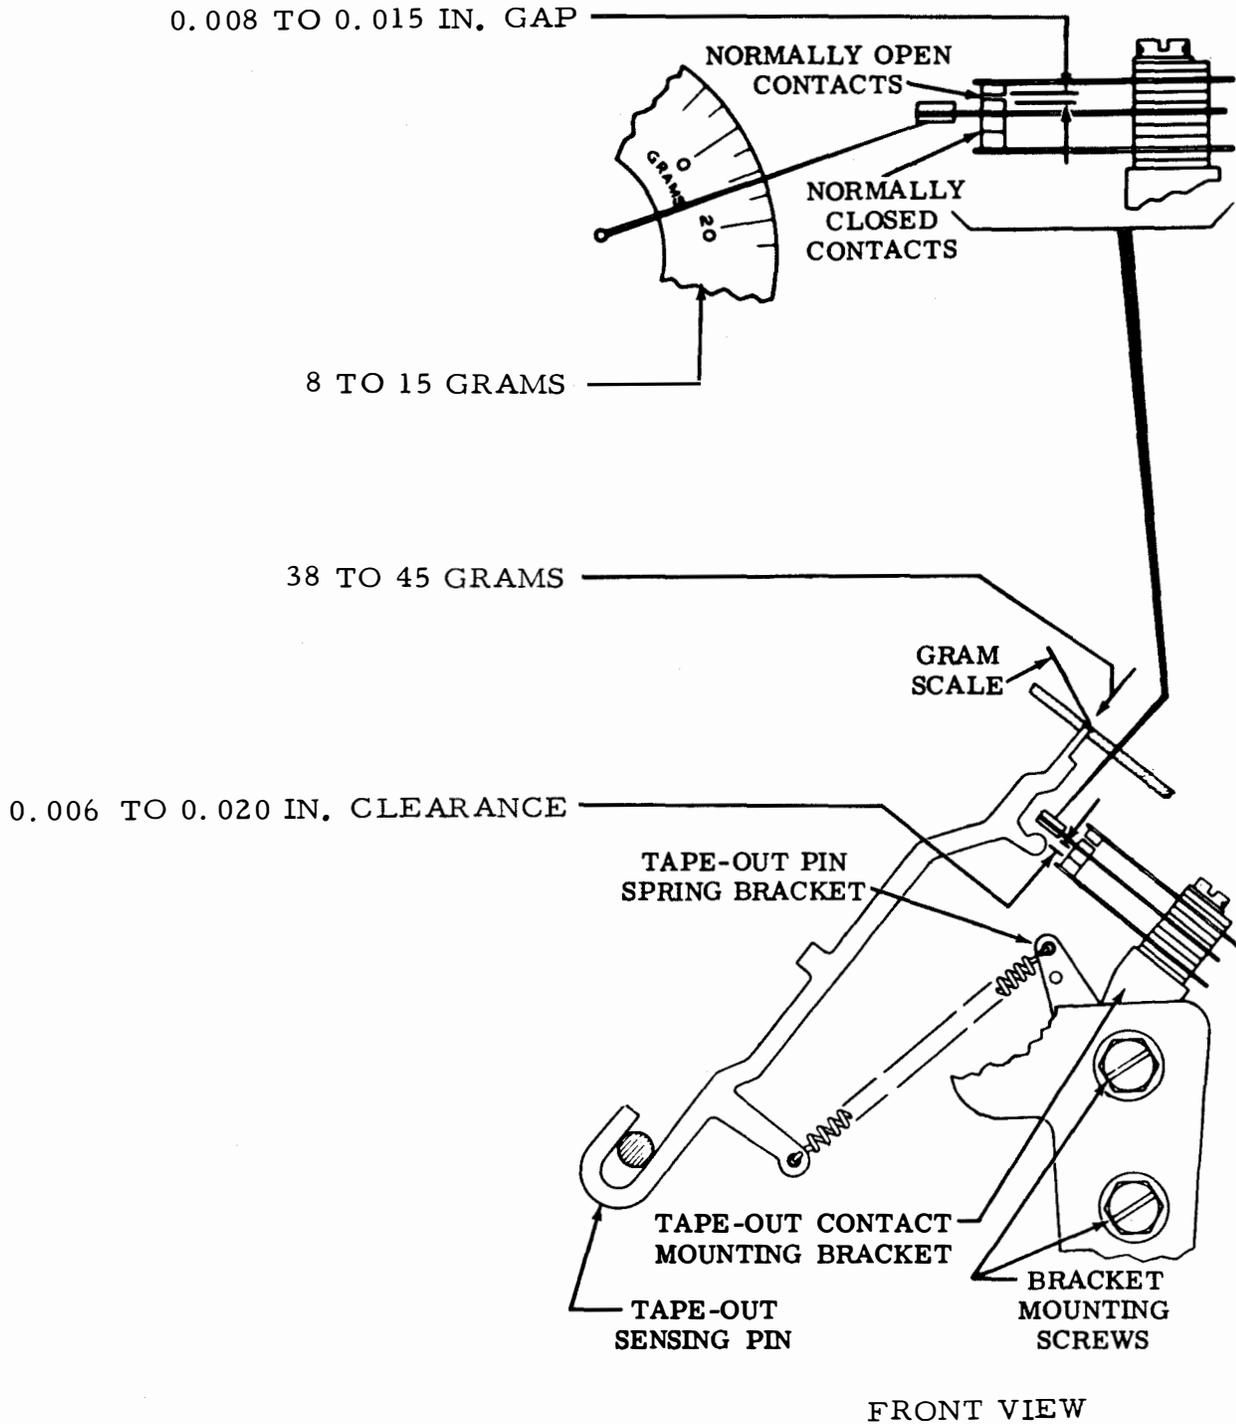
Tape-Out Contact Assembly, Tape-Out Sensing Pin Spring, and Tape-Out Contact Bracket
